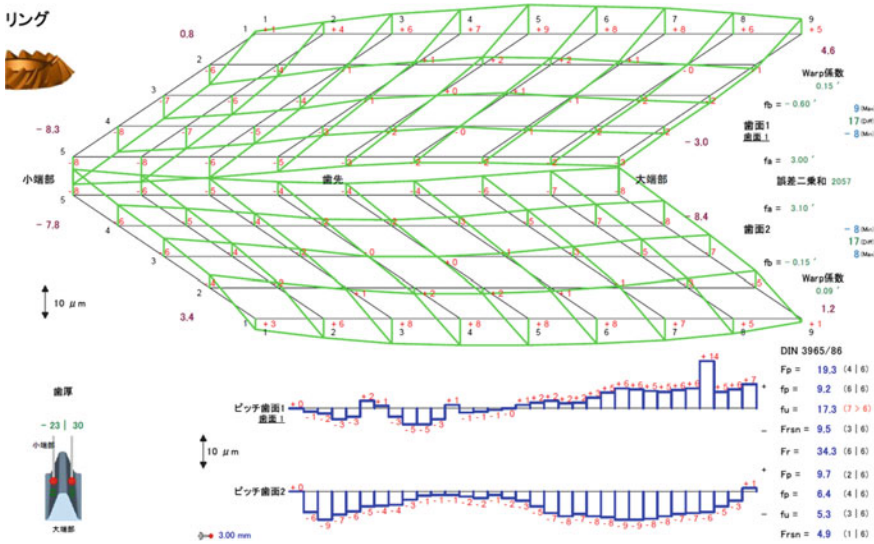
Pitch and tooth flank form accuracy of an IPB wheel
